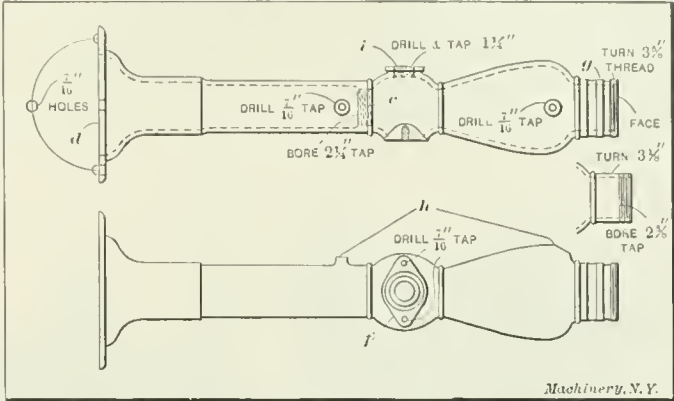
Pump Casting upon which Fourteen Operations are performed in Special Machine shown in Fig. 1
